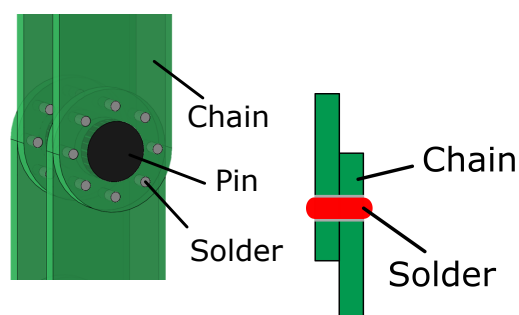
Enlarged view of Fig. 13. Structure the chain joint of chain
